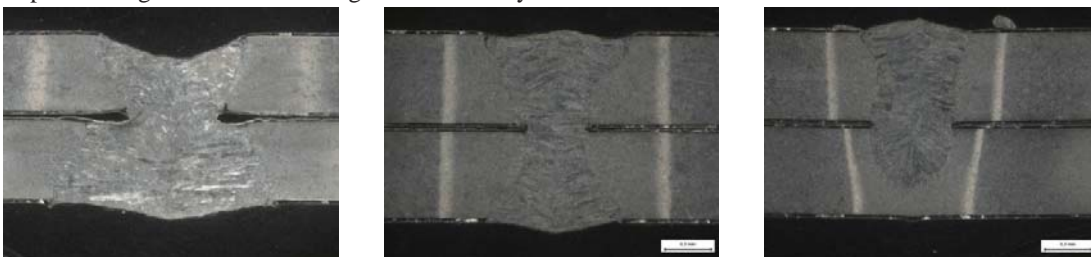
Cross sections of welds with travel speed 1.5 m/min (left), 3.5 m/min (center) and 7.5 m/min respectively
